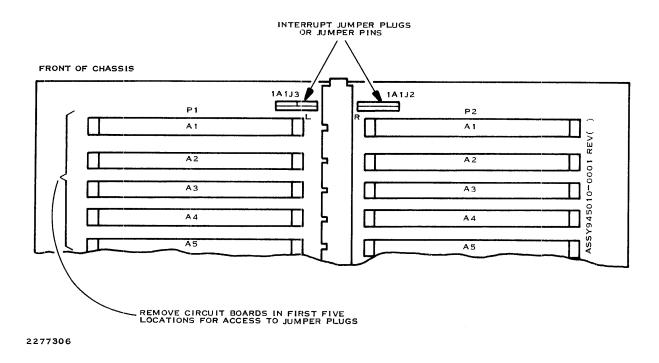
Location of Interrupt Jumpers, 6-Slot and 13-Slot Chassis
